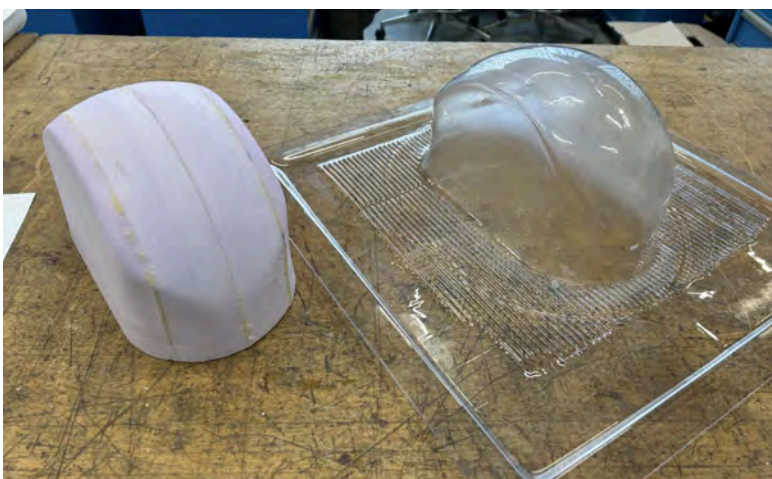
, The milled foam mould together with the initial result of the water basin after vacuum forming
